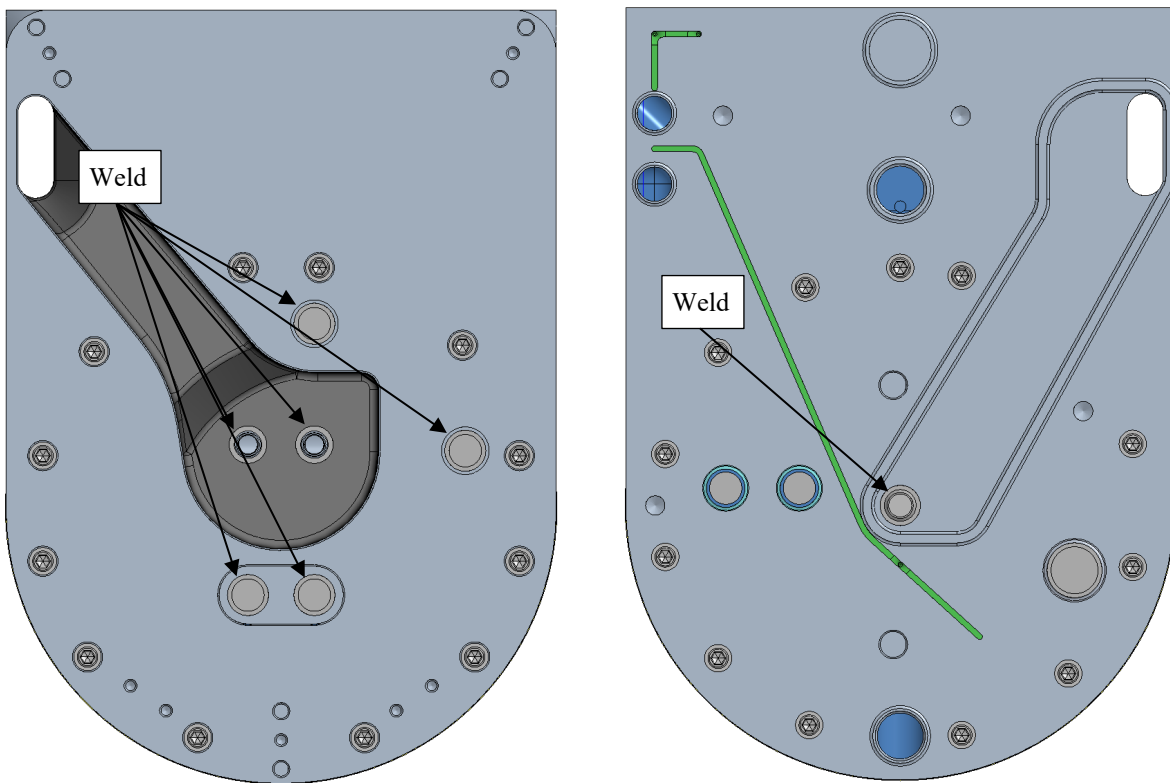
Lower (left) and upper (right) reflector vessel to backbone connection welds.
